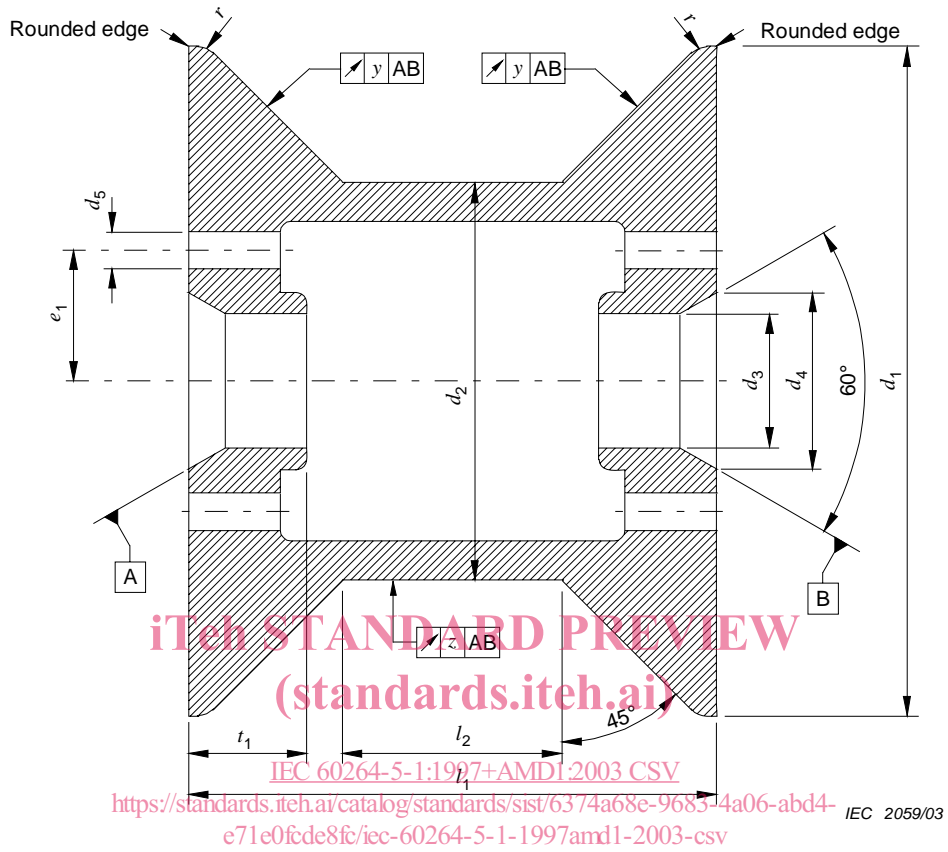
Cylindrical barrelled delivery spool with conical flanges
